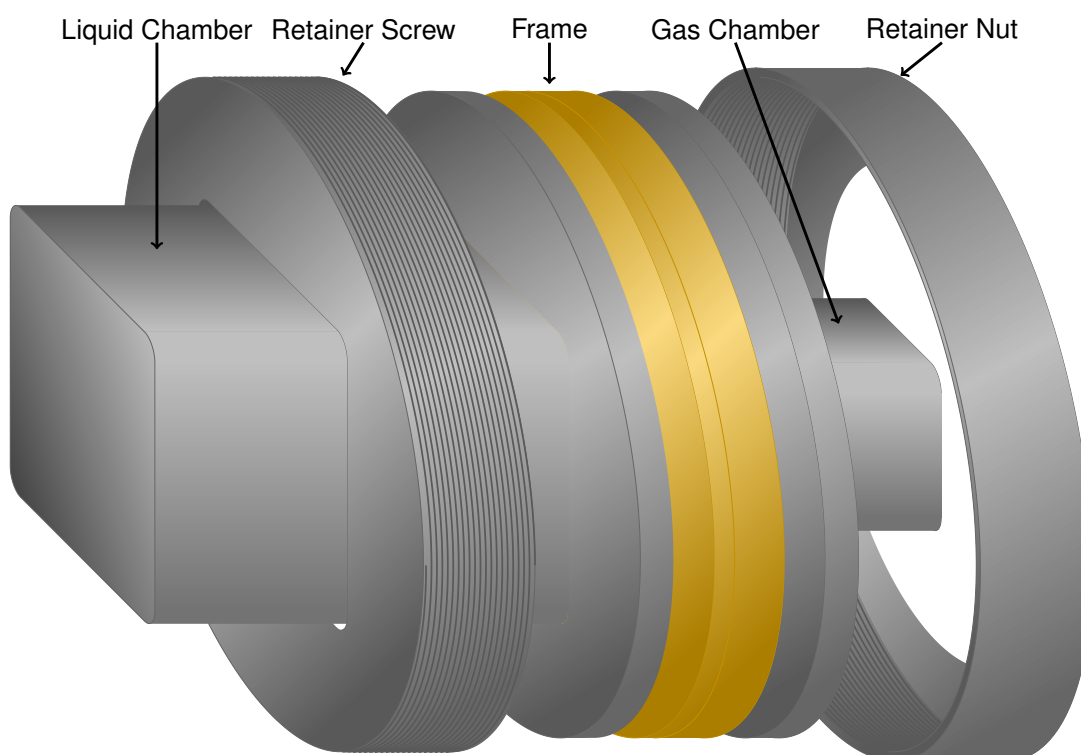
Assembly of diffusion cell: the frame is sandwiched by the two chambers fixed with retainer screw and retainer nut.
